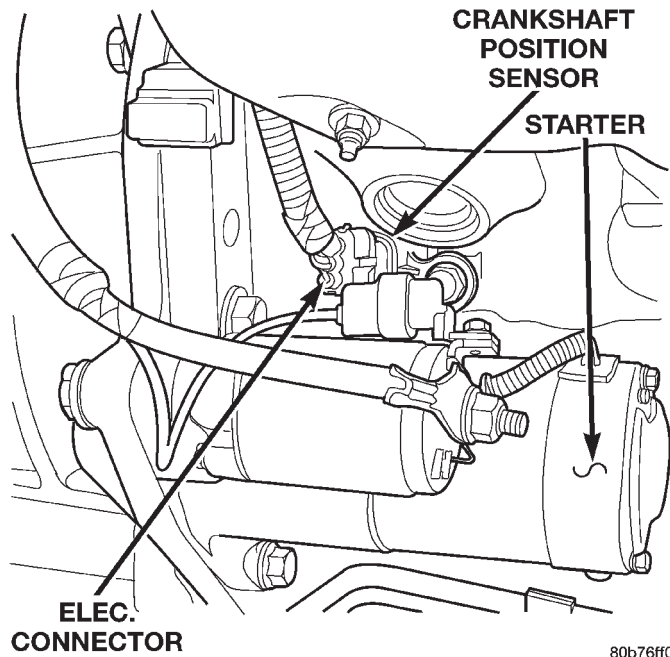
Crankshaft Position Sensor—4.7L V-8 Engine
